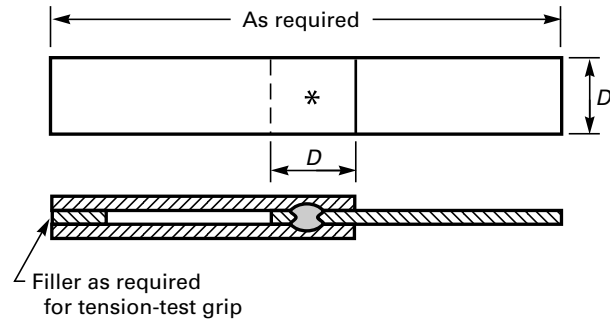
SEAM-WELD SPECIMEN FOR TENSION AND MACROSECTION, TWO-PLY JOINT
